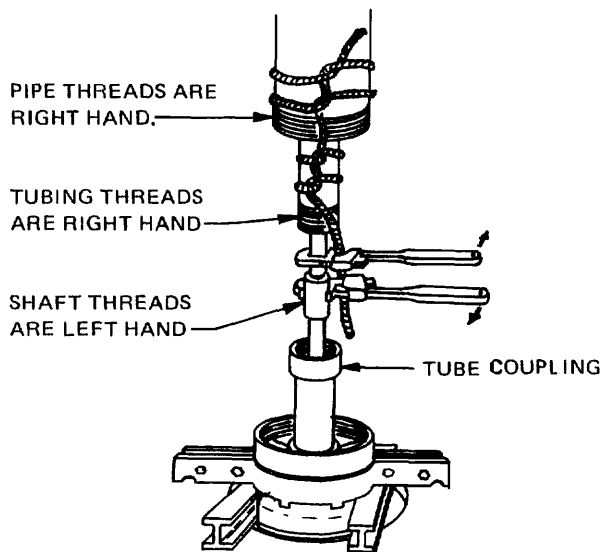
ASSEMBLING SHAFTING AND TUBING
